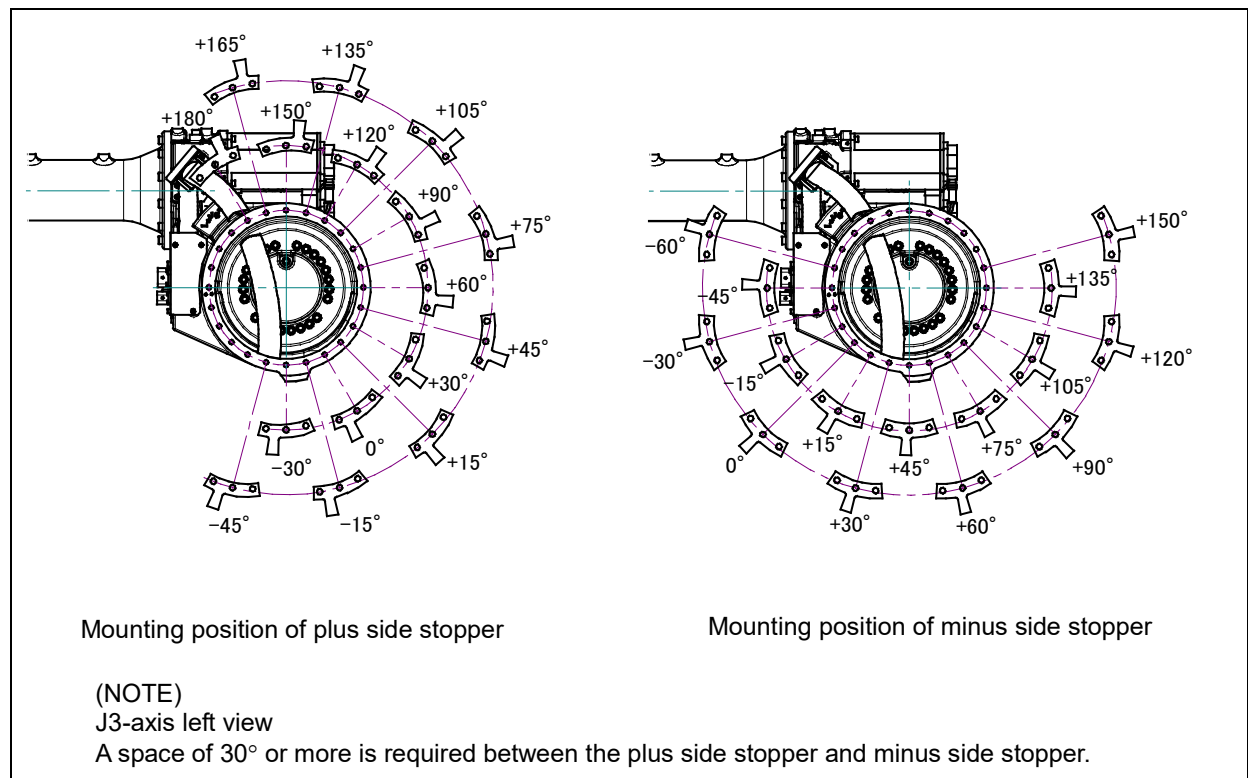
(k) Mounting the J3-axis mechanical stopper
